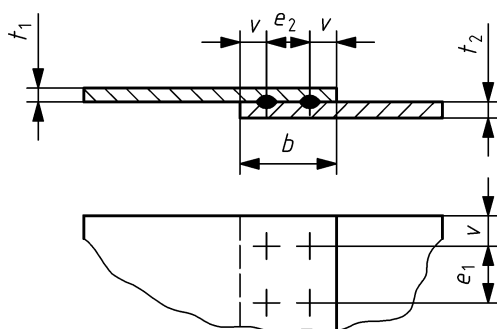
Resistance spot welding of angled profiles and plates
